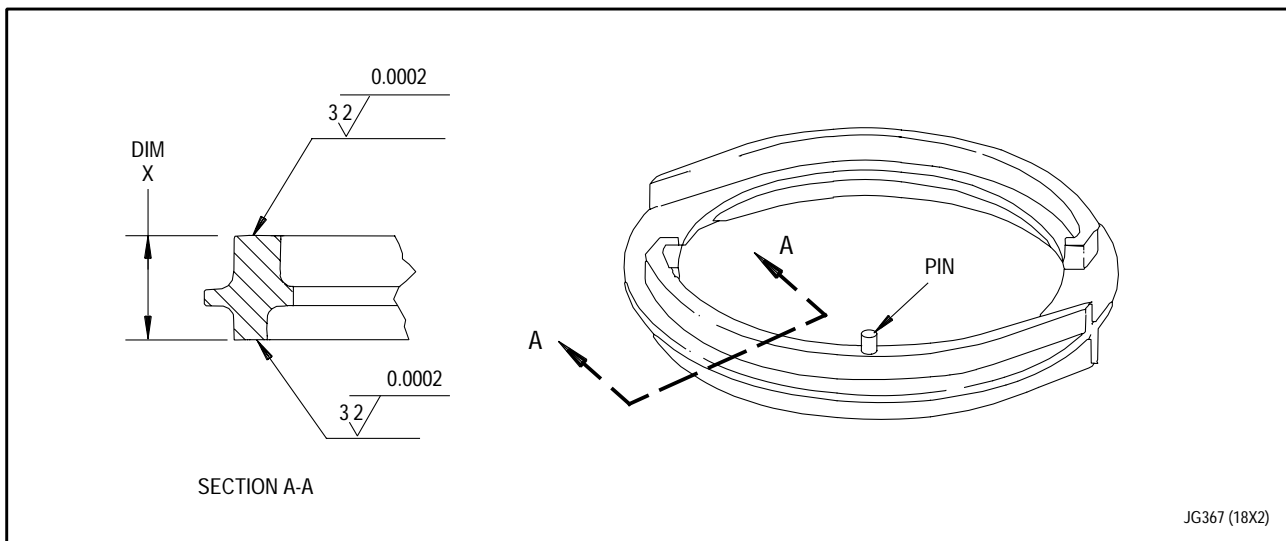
No. 2 Bearing Front Scoop Assembly - Repair
